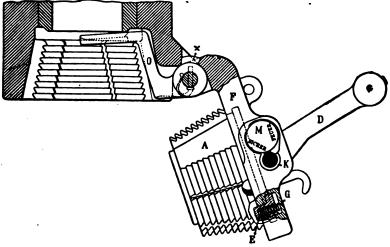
Krupp's 15 cm. screw mechanism, open.
